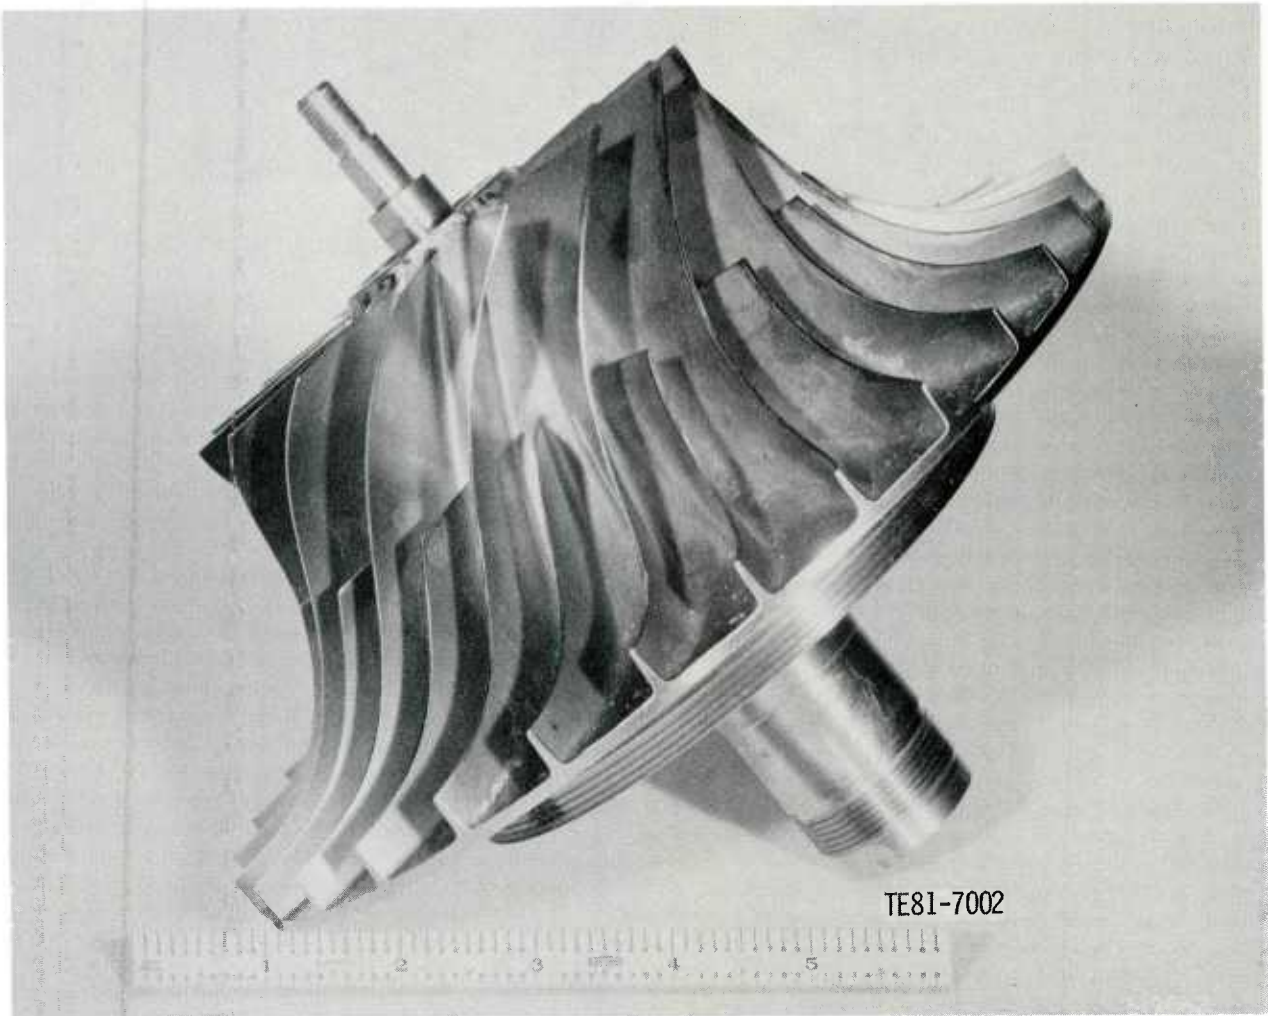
Model 250-C28 cast Ti-64 engine test impeller.
